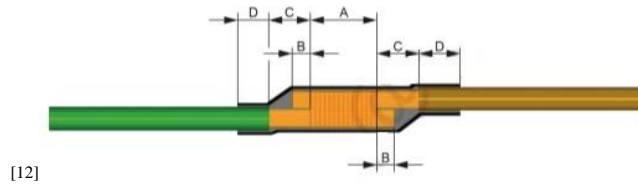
Ultrasonic welded splice of two wires protected by a shrink tube
